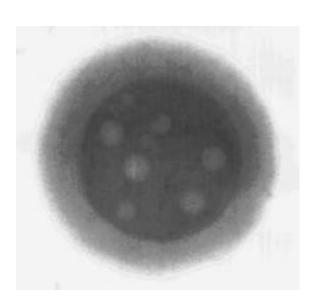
X-ray Micrograph of a Mounted PBGA Showing Voiding in the Solder Joints
